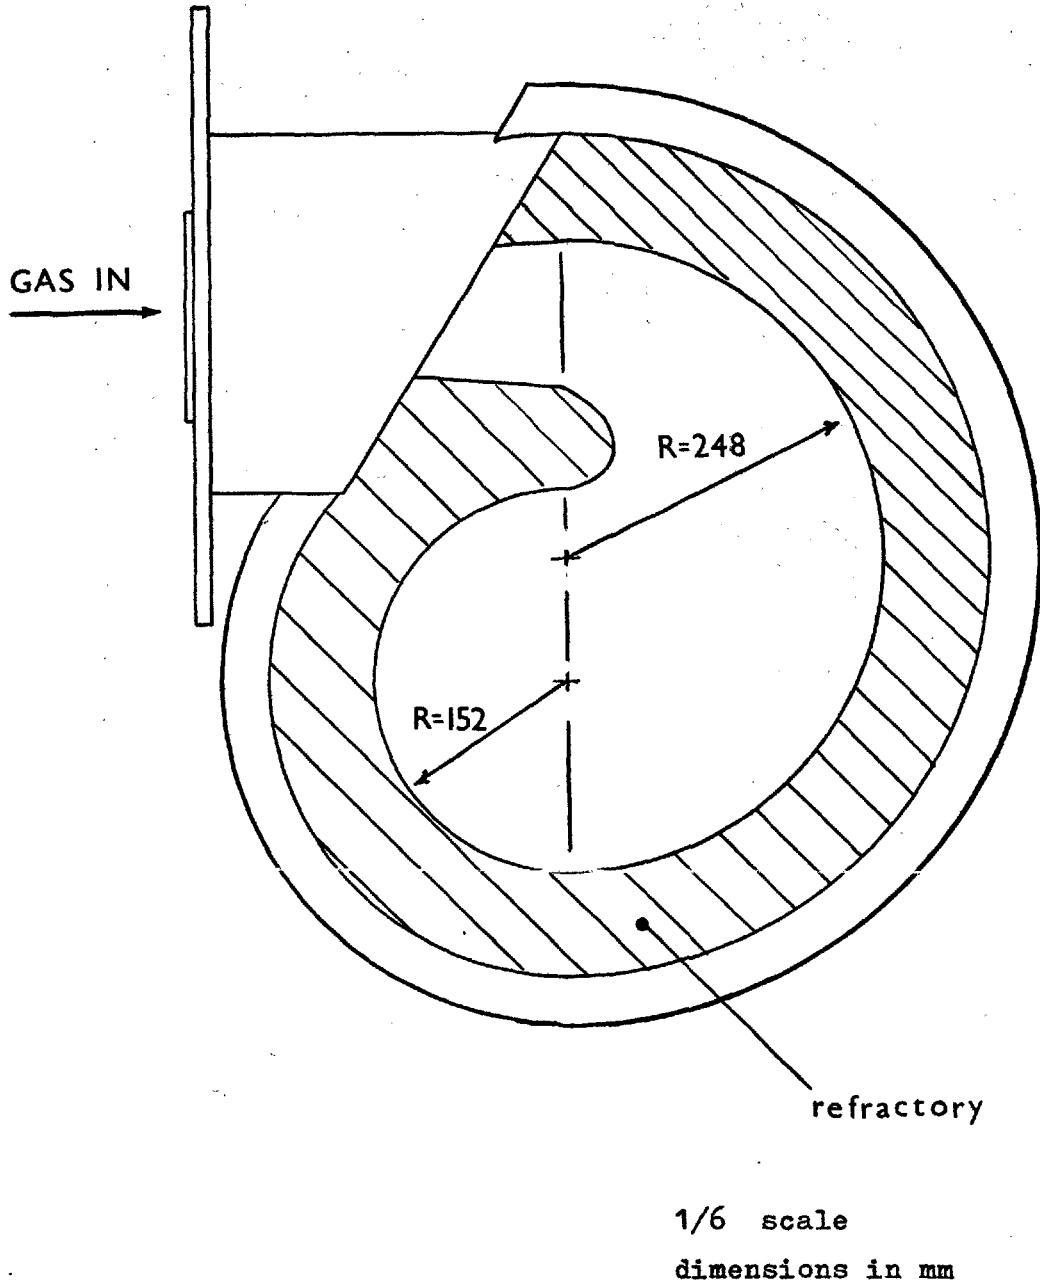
PLAN VIEW OF CYCLONE GAS ENTRY SECTION.
